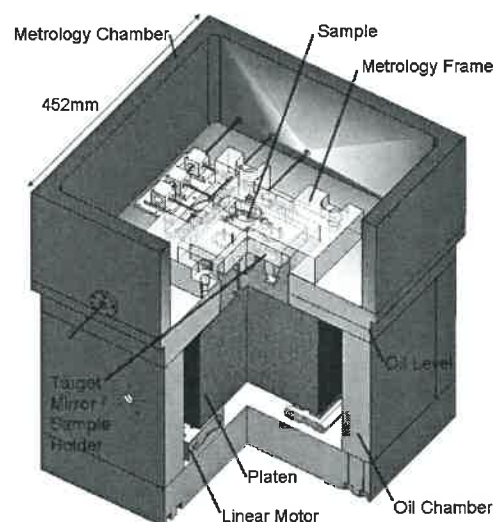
Section view of the Sub-Atomic Measuring Machine showing the major components.
